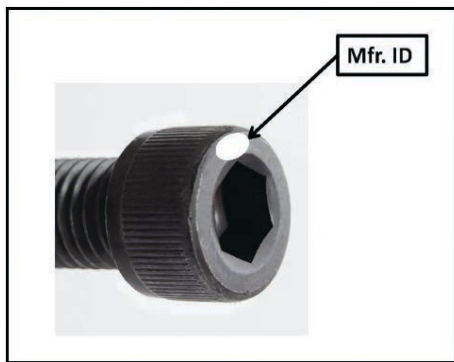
EXAMPLE OF ASTM A574 HEAD MARKING (ALSO MAY HAVE A574 OR BE LOCATED ON SIDE)
